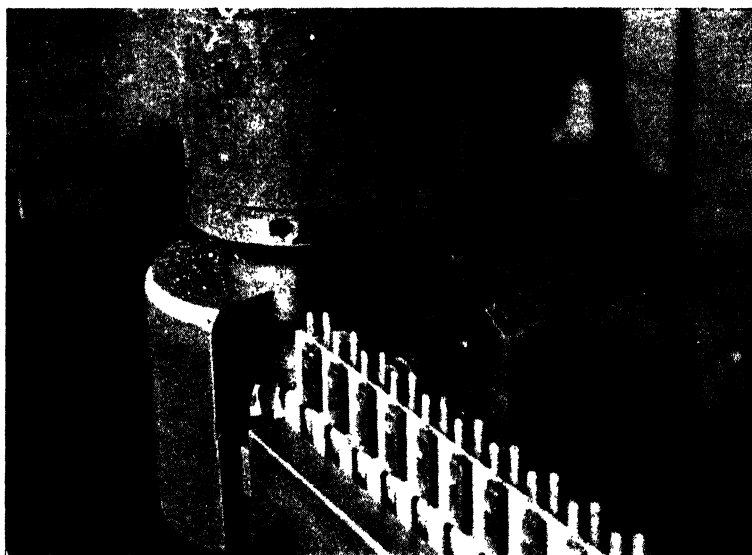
GUARD FOR VERTICAL MILLING MACHINE
